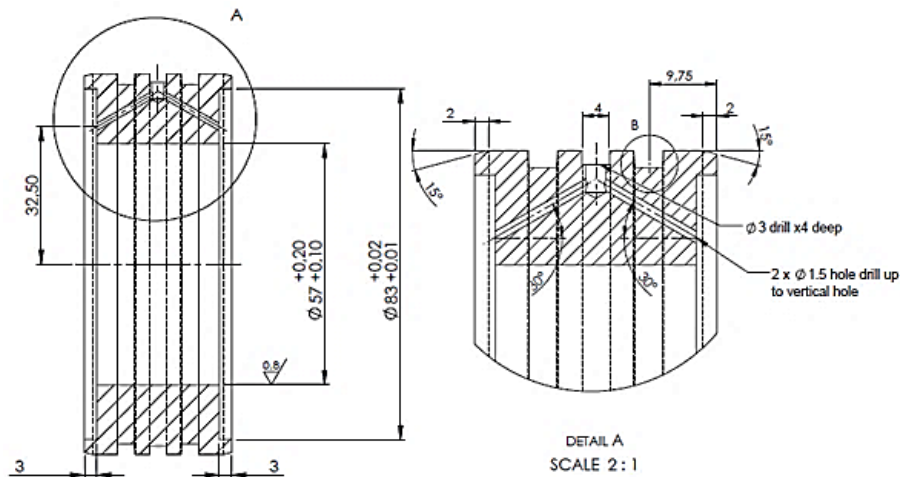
Outer Spacer for the Front Bearing Arrangement for the HSPM Generator
